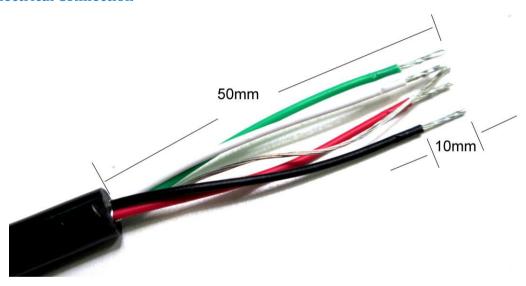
Typical HMA Geotechnical Vibrating Wire Piezometer cable
